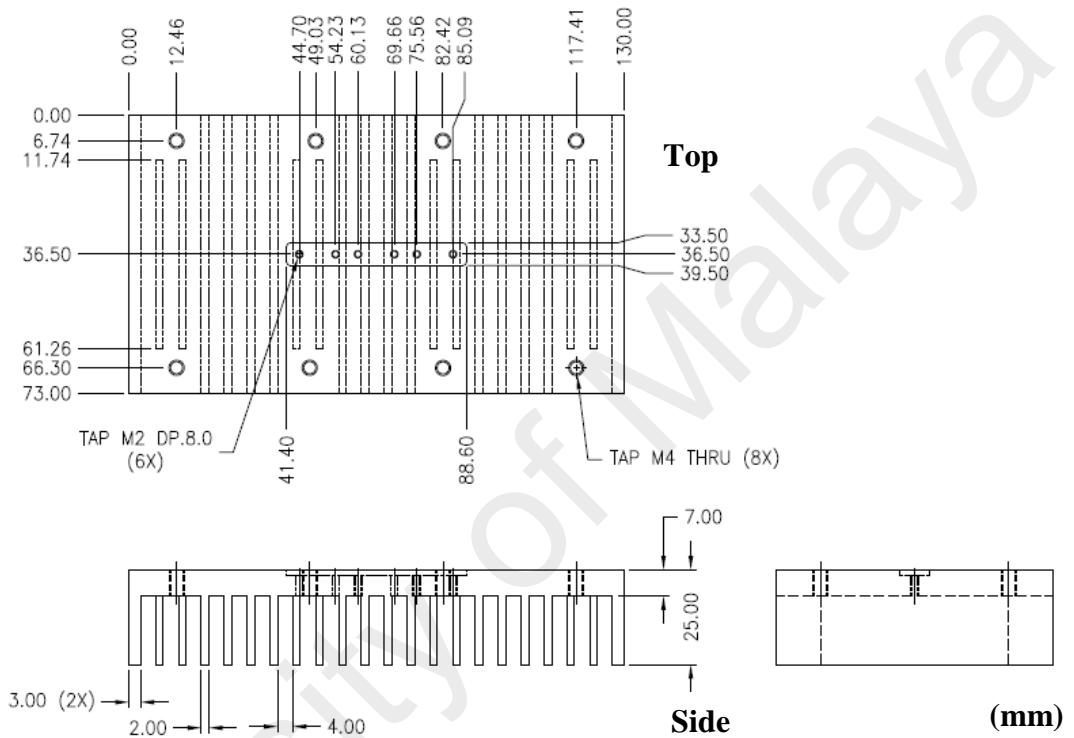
Sketching of the aluminum heat sink used to secure the PCB.
